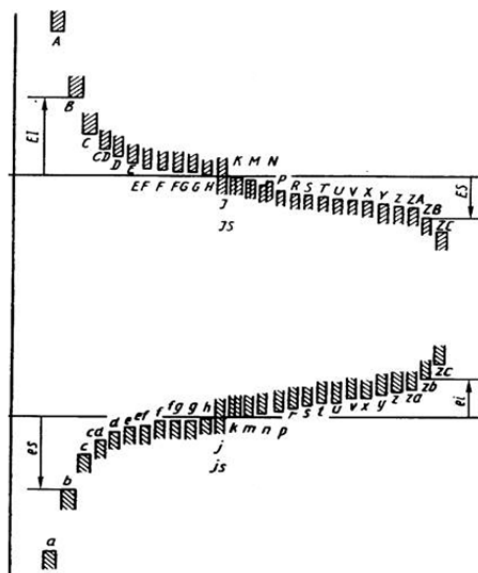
Regarding positions of tolerances zones for sizes of holes and shafts
